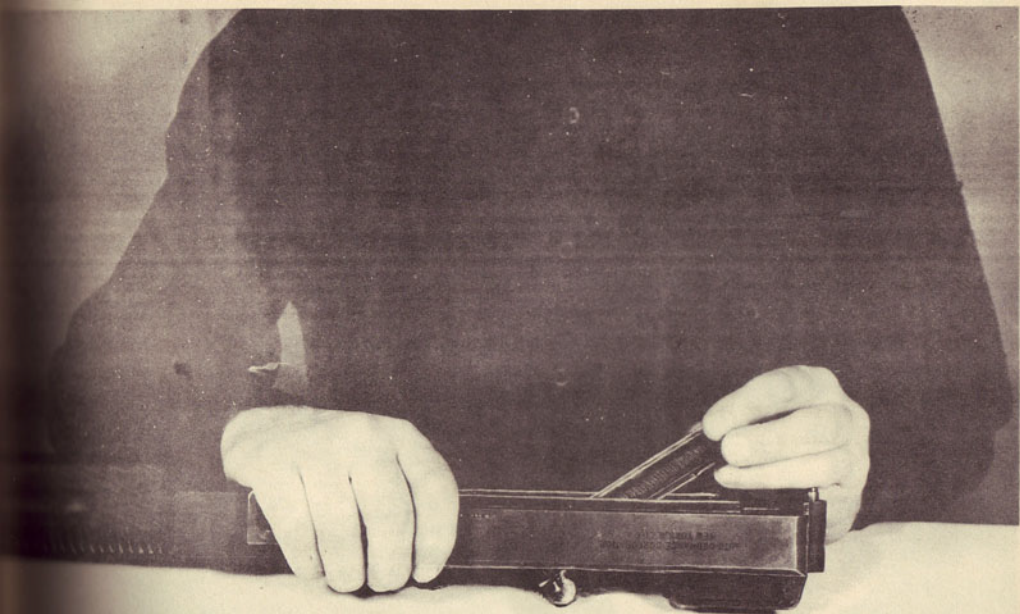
Insert ACTUATOR in RECEIVER, knob to front.
